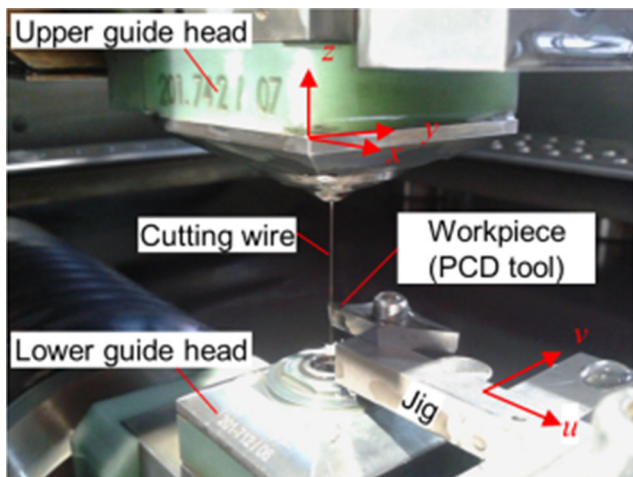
Experimental setup for the fabrication of micro cutting tool
